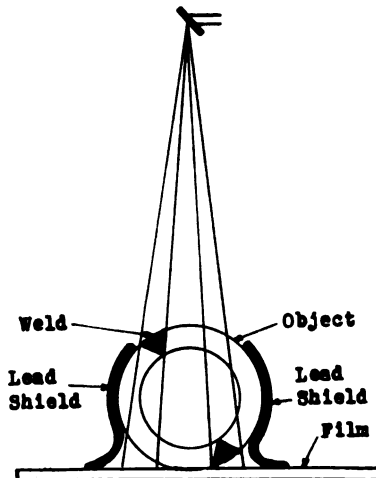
Longitudinal Weld in a Cylinder or Tubing.
